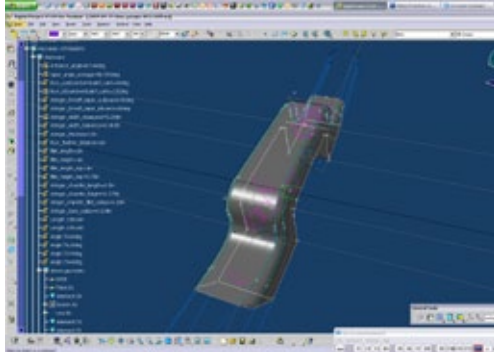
dp floor model ~ defining the stringer-hoppers.jpg
